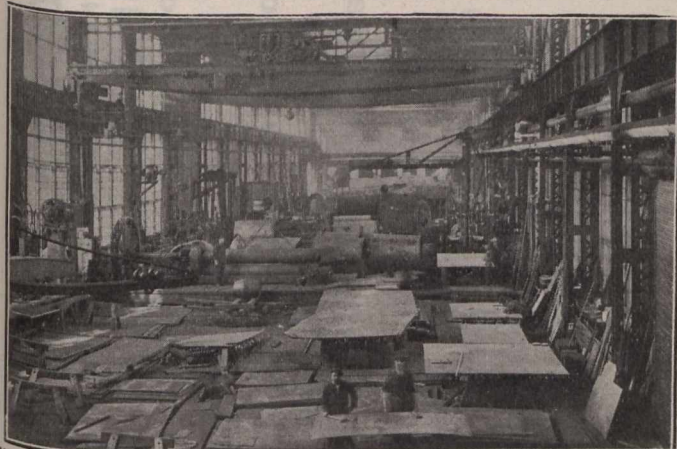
View of Boiler Shop, looking from Outer End towards the Assembling and Erecting Floors.
